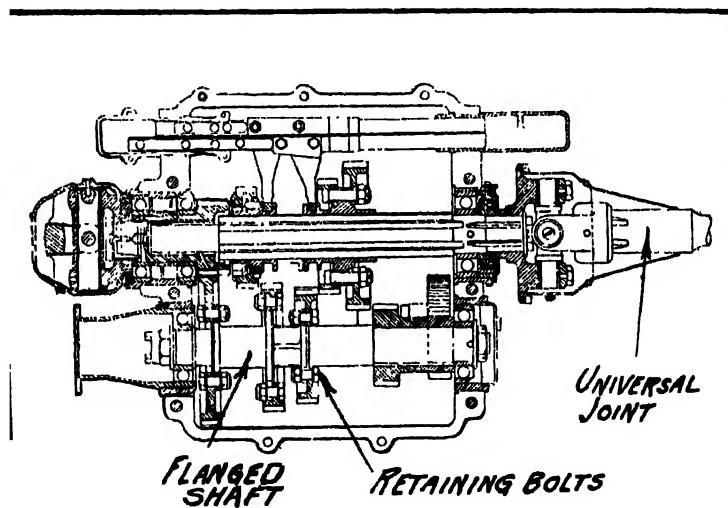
Four Speed Selective Sliding Gearset of Approved Design.
